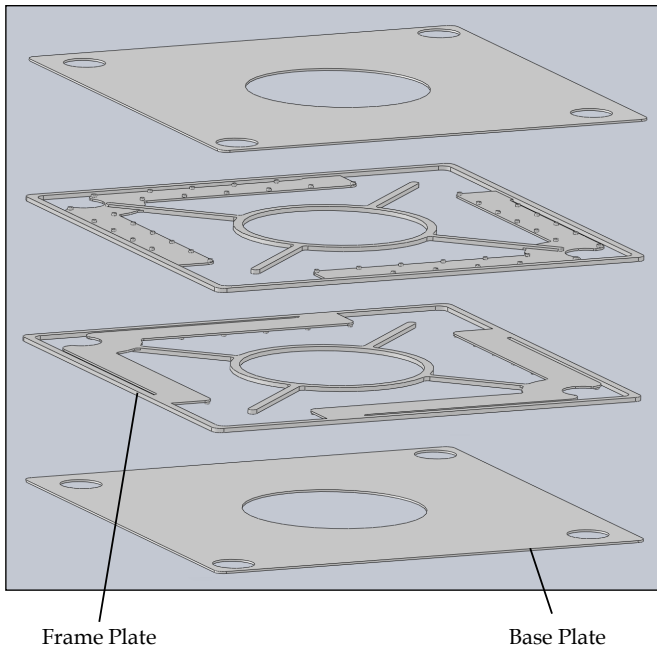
Exploded view of condenser consisting of four photo-chemically etched plates that are brazed together to form fluid channels.
